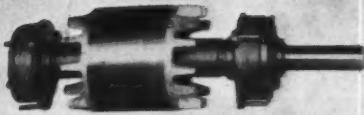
Solenoid is utilized for actuating brake mechanism on armature shaft of motor
